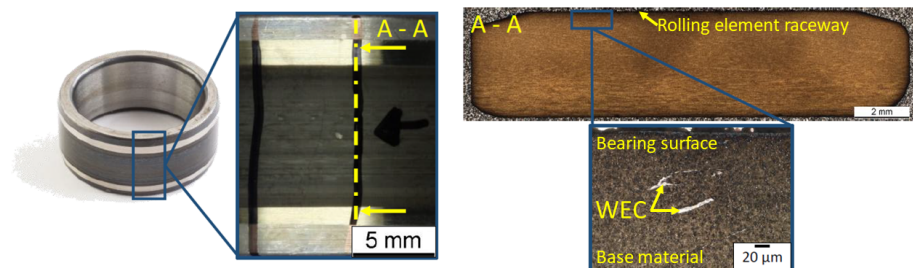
Inner ring of a of a cylindrical roller bearing (Type NU206 made of AISI 52100 steel) affected by current passage (left), metallographic analysis after the etching process, showing WEC (right) [22].
